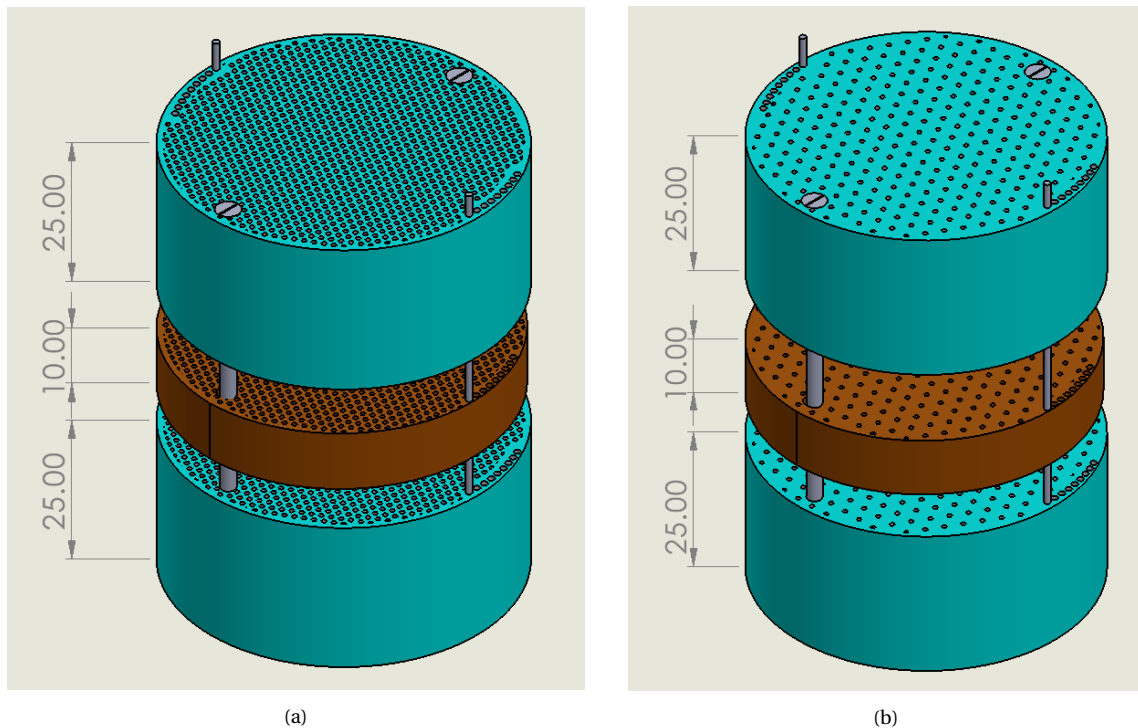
Assembly of the three perforated samples; (a): $l_h = 1.5$ mm sample; and (b): $l_h = 3$ mm sample (all dimensions are in mm)
